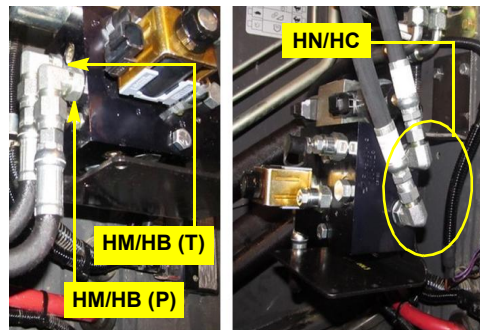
Pressure and tank hoses at steering block (left); steering hoses at steering block (right)
